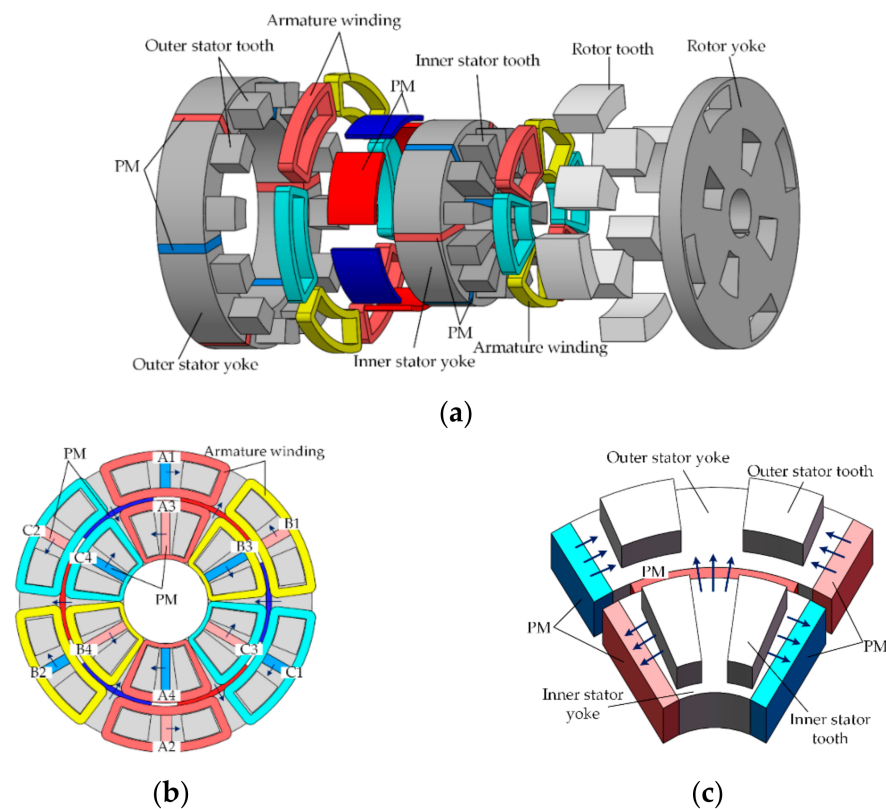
6/4 AxFSPM structure diagram: (a) exploded view; (b) vertical view; (c) stator core module.
